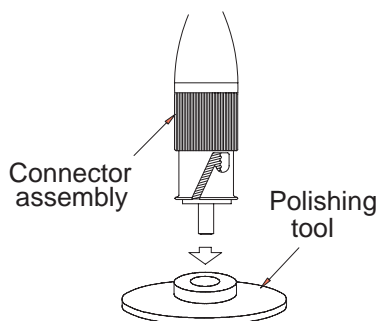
Inserting the Connecting into the Polishing Tool
